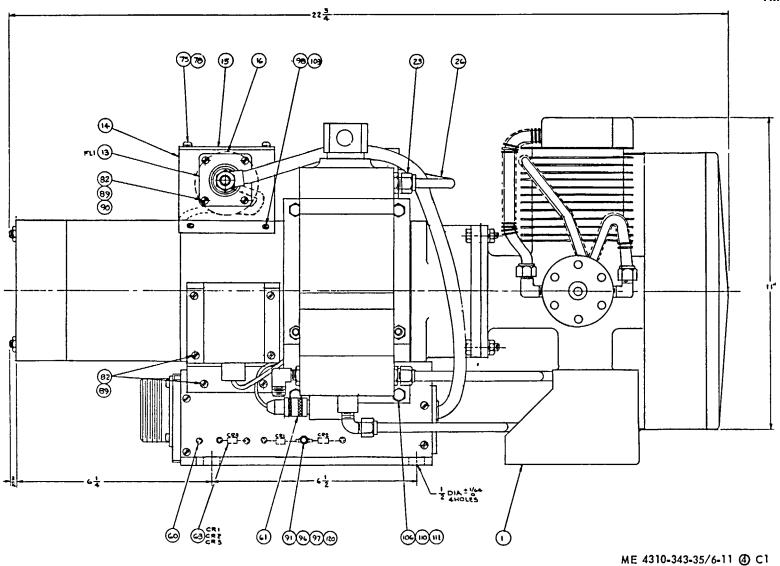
Motor-compressor assembly, Bogue Electric model 6703). (sheet 4 of 5)
